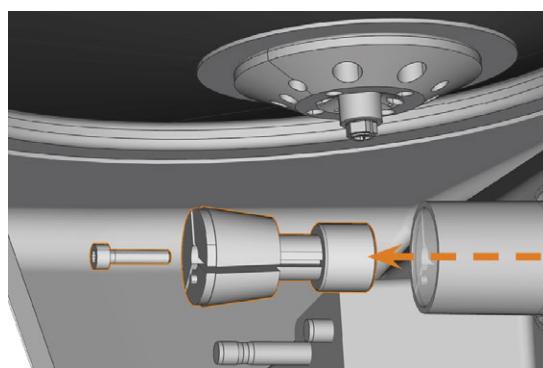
REMOVING THE COLLET CHUCK FROM THE BLANK HOLDER
